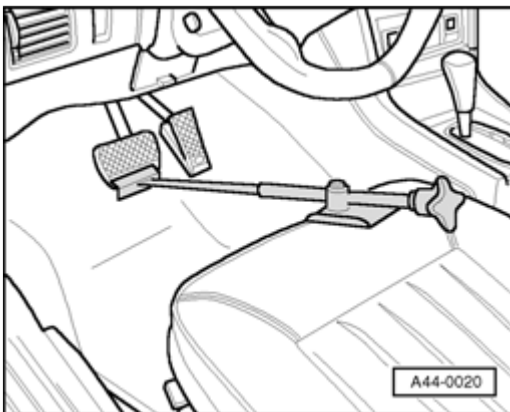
Brake Pedal Depressor VAG 1869/2 Inserted Between Brake Pedal And Driver's Seat
